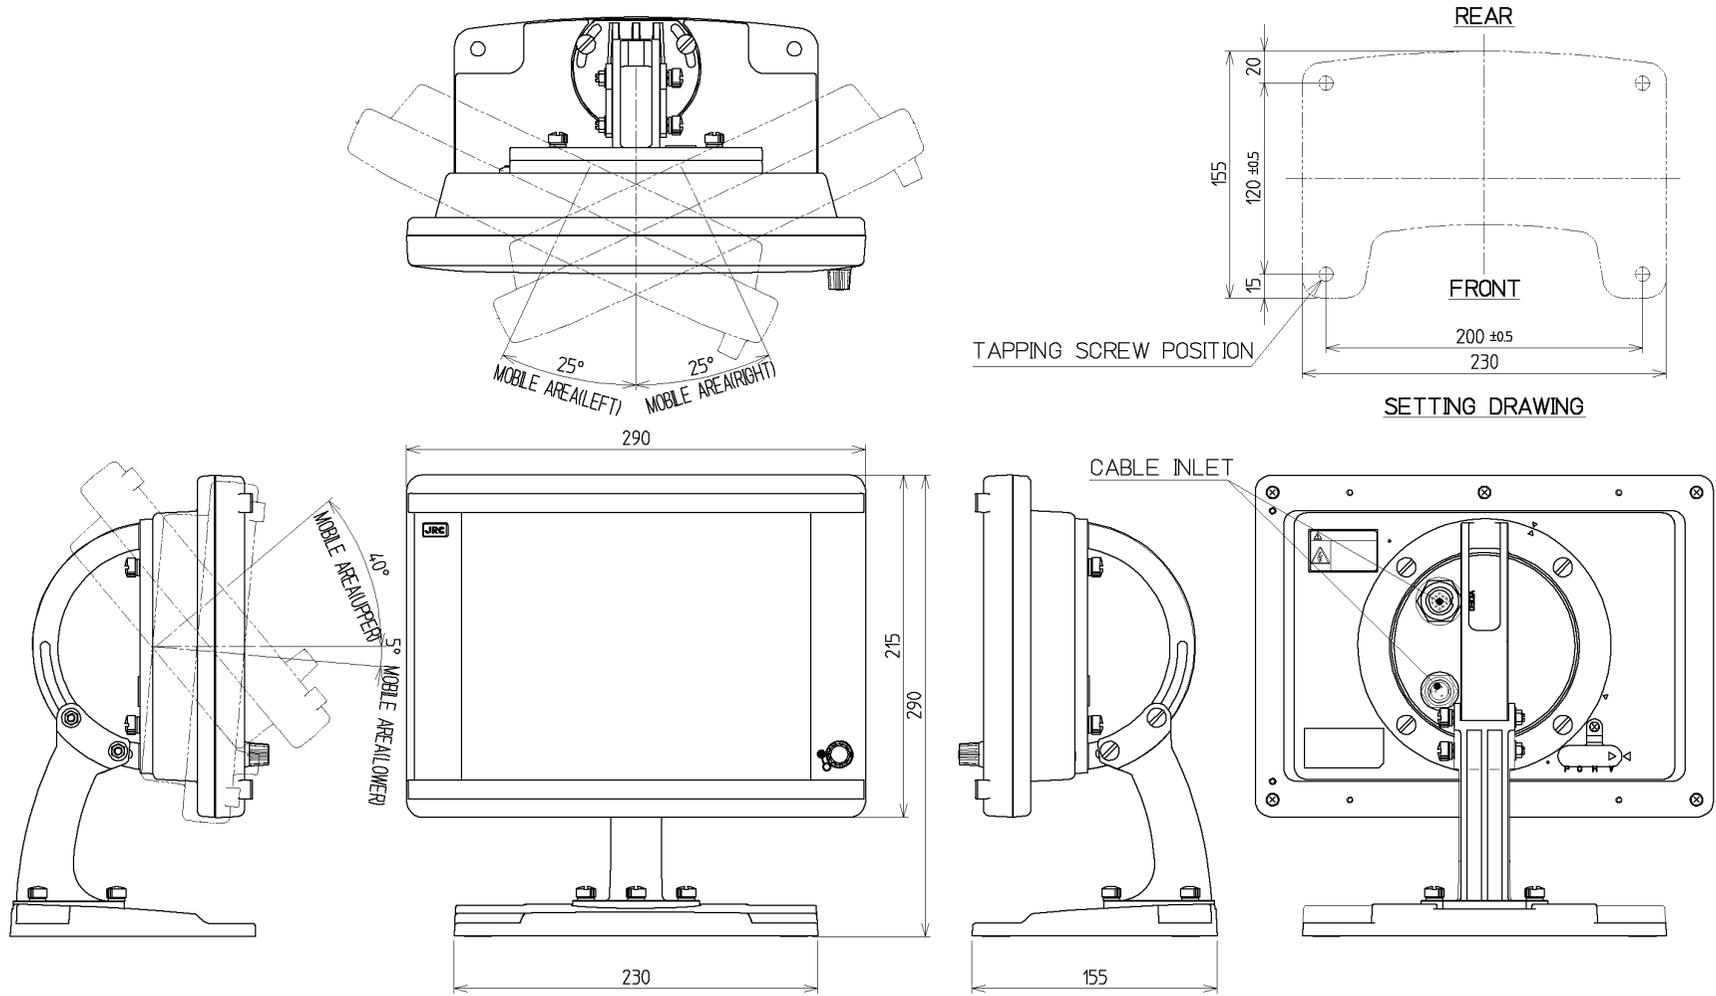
OUTLINE DRAWING OF KEYBOARD UNIT NCE-7640
